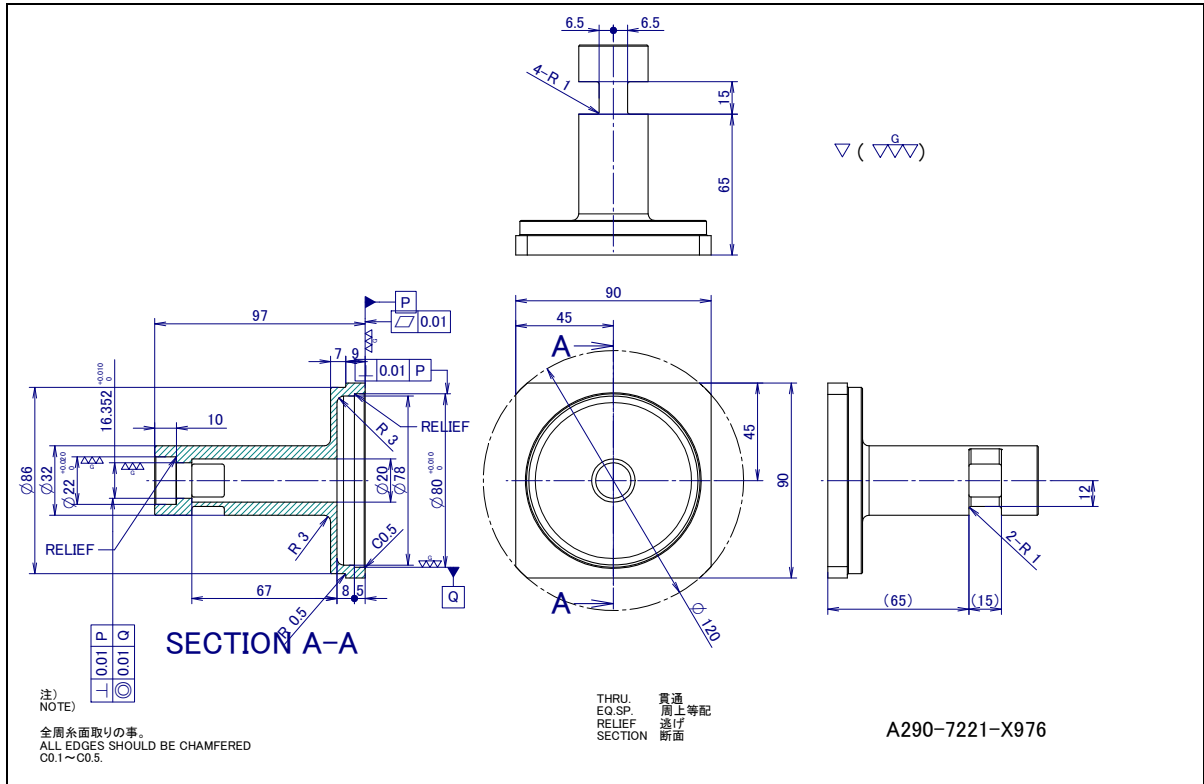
(k) Mounting fixture for gear of J3-axis motor
